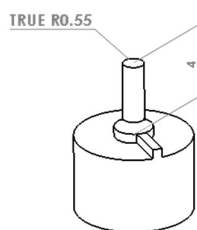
3D geometrical design of inlet and outlet (unit mm).
